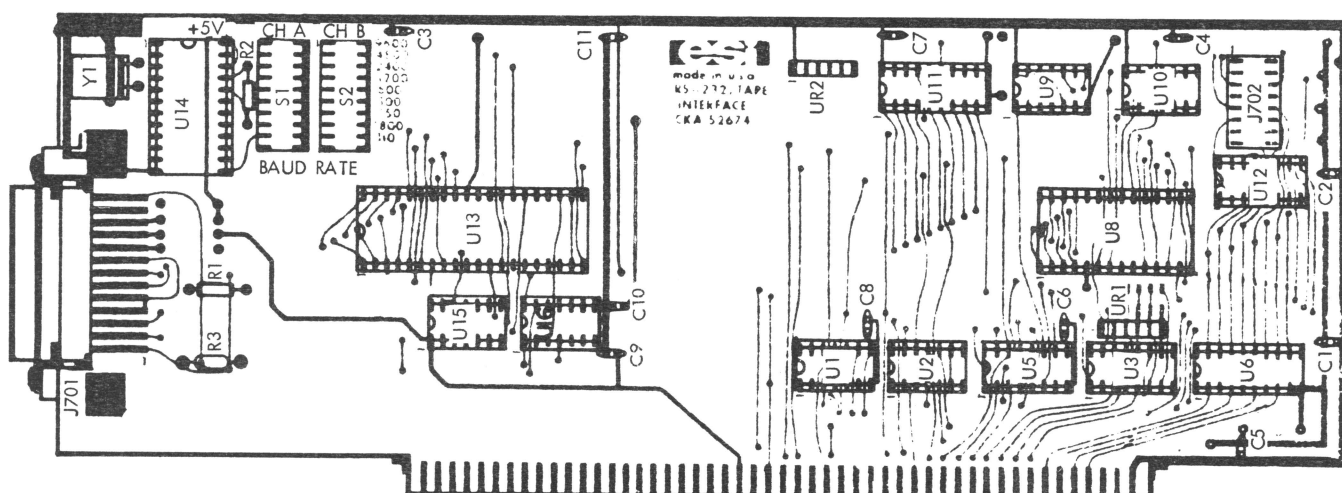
RS-232C Interface Circuit Assembly (P/N 46724)
